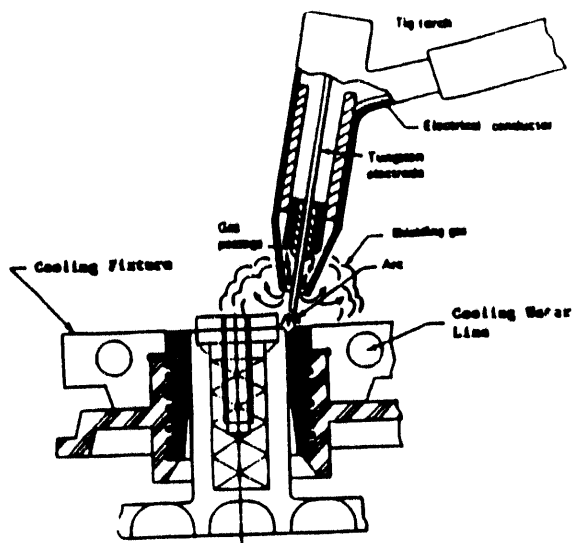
The TIG welder improves weld depth and appearance without heat damage to the plastic.
